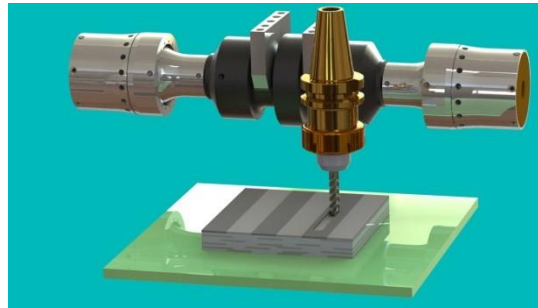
Illustration of the ultrasonic additive manufacturing process (image courtesy of Ultra Tech Machinery).
